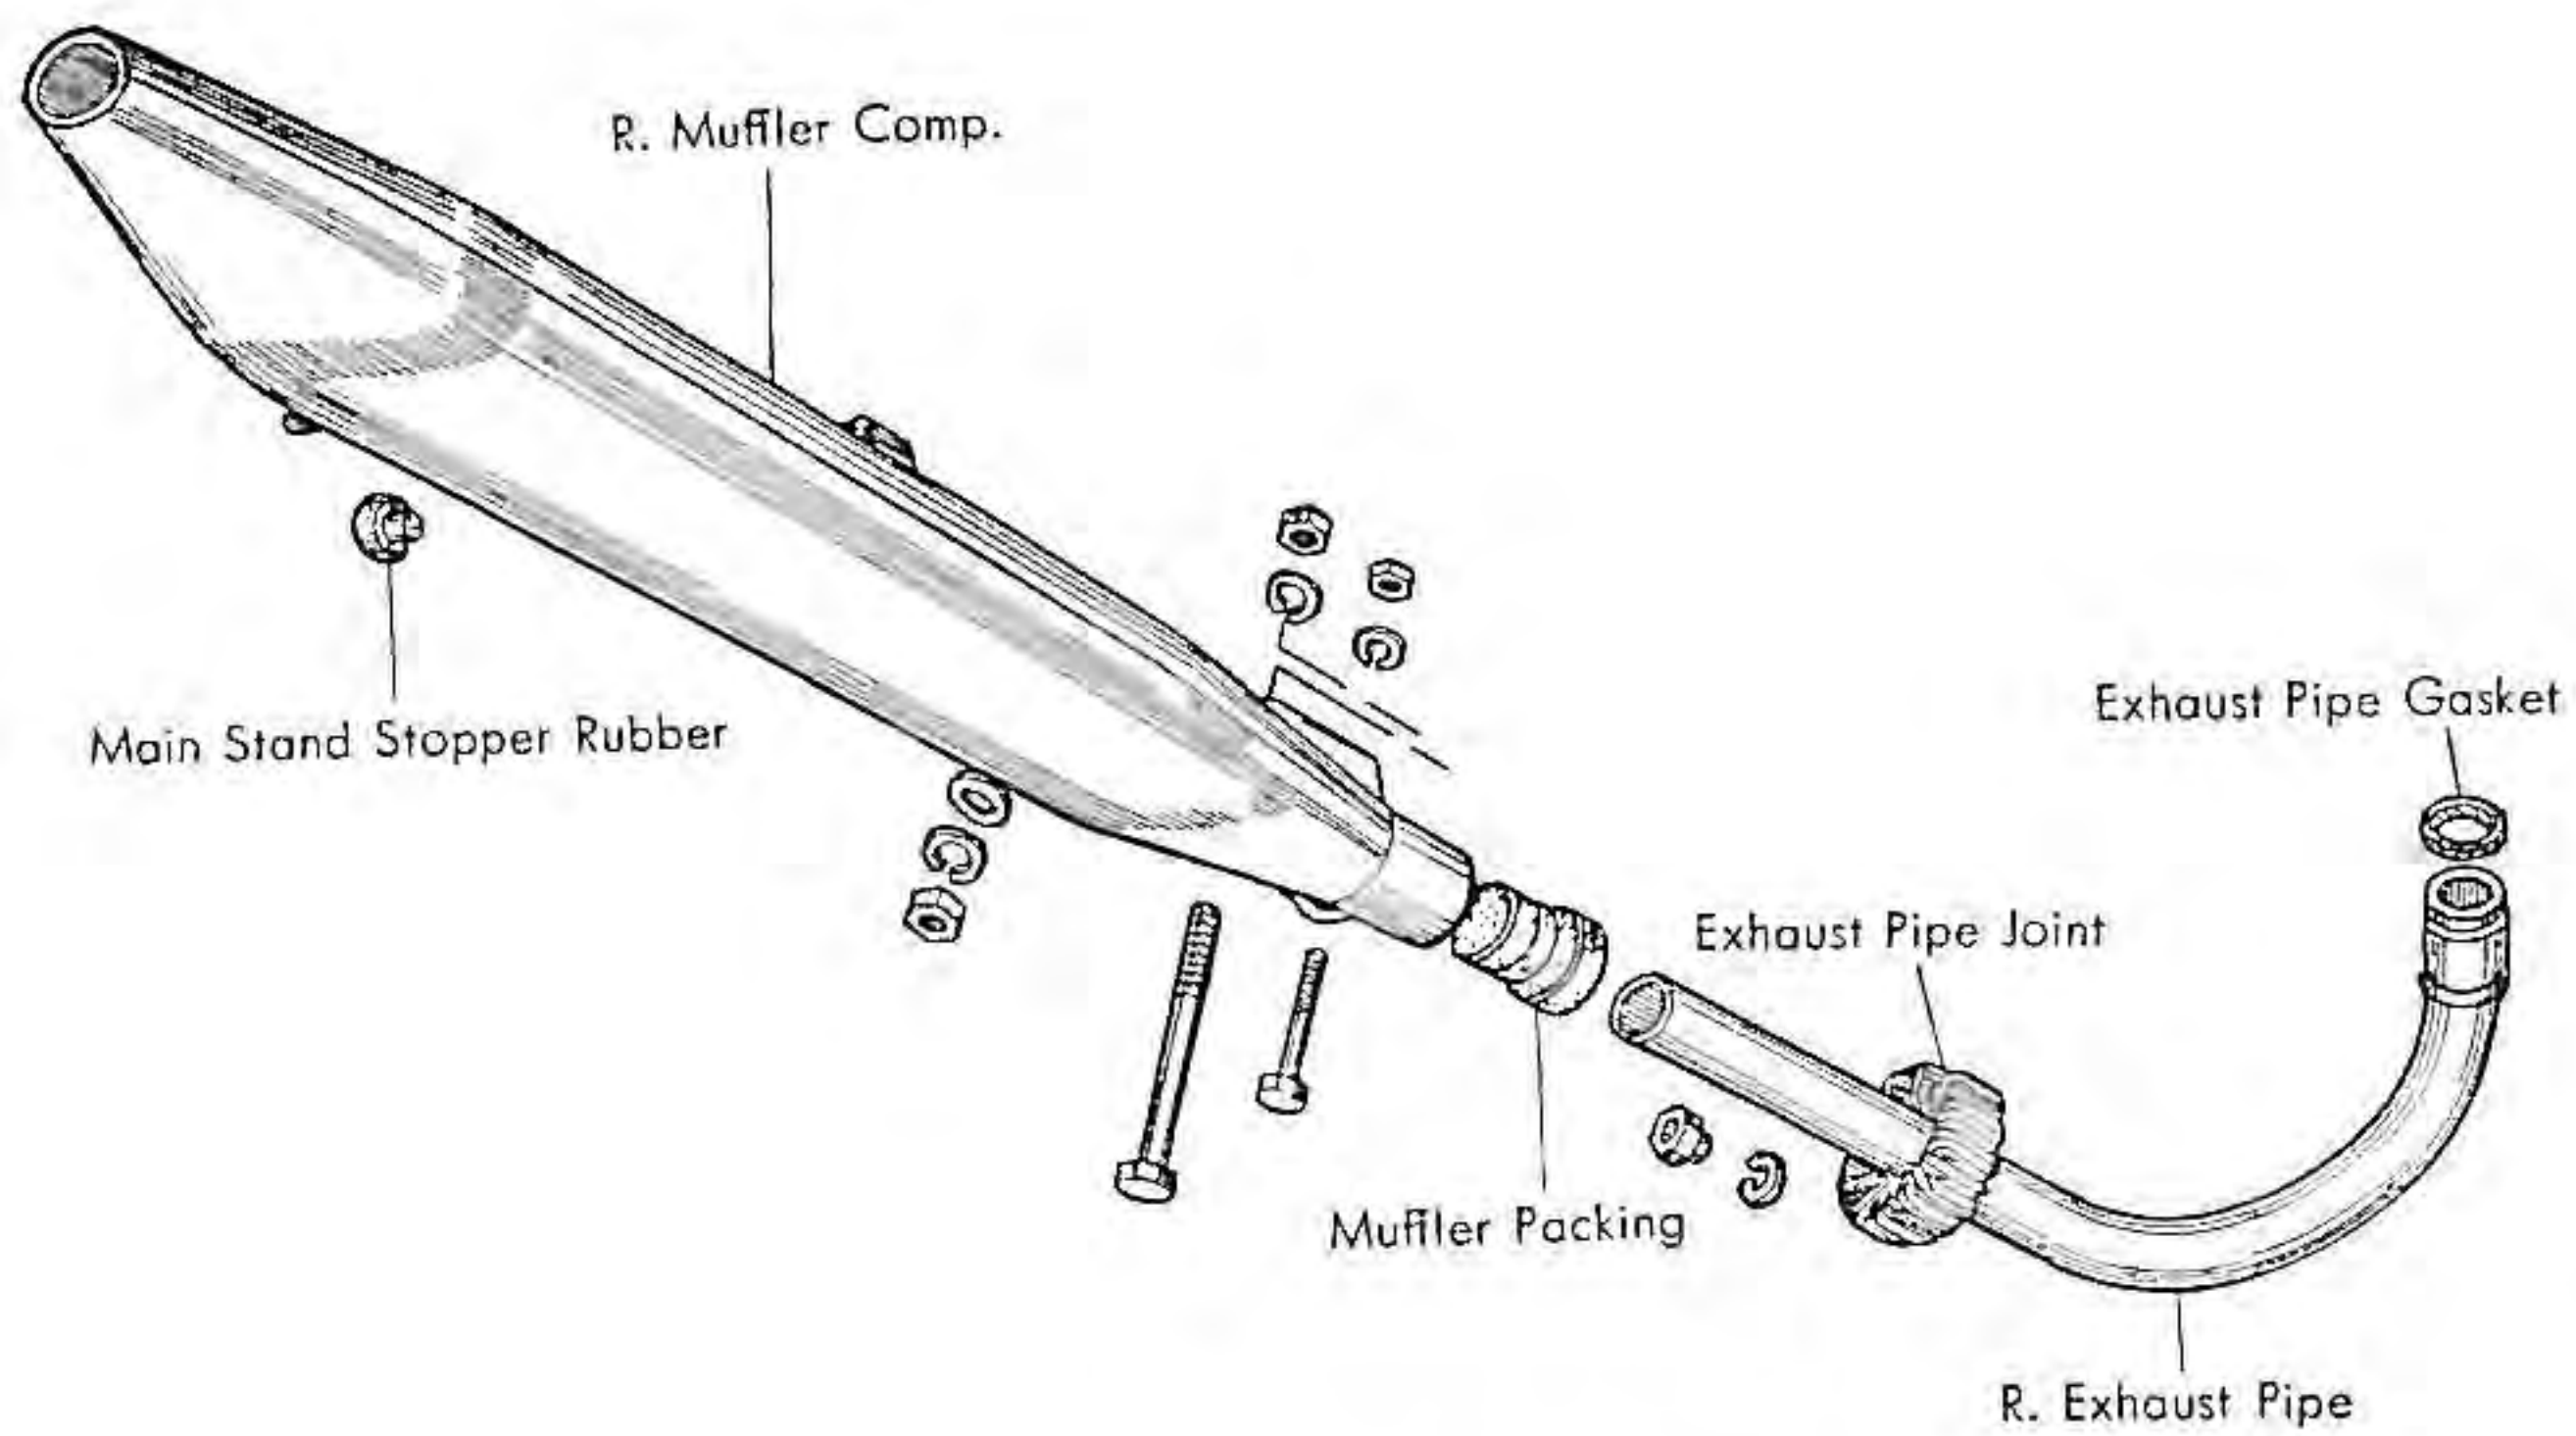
Exhaust pipe and muffler box (C92 & CA95)
